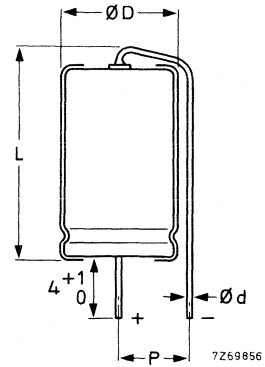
Style 3; see Table 1b for dimensions d, D, L and P.
